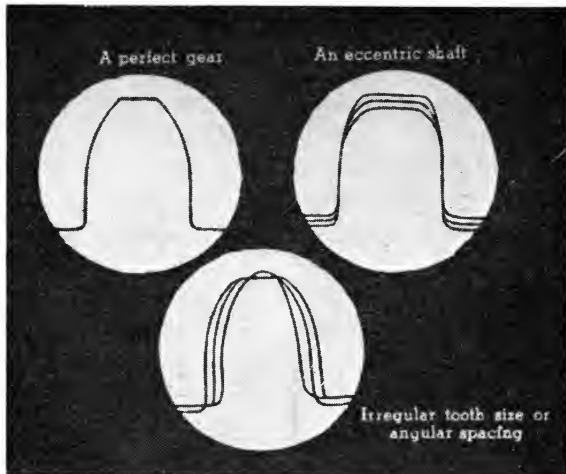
Typical patterns obtained with perfect and defective gears. A perfect gear is shown in the upper left; an eccentric shaft in the upper right; and an irregular tooth size or angular spacing, below.
